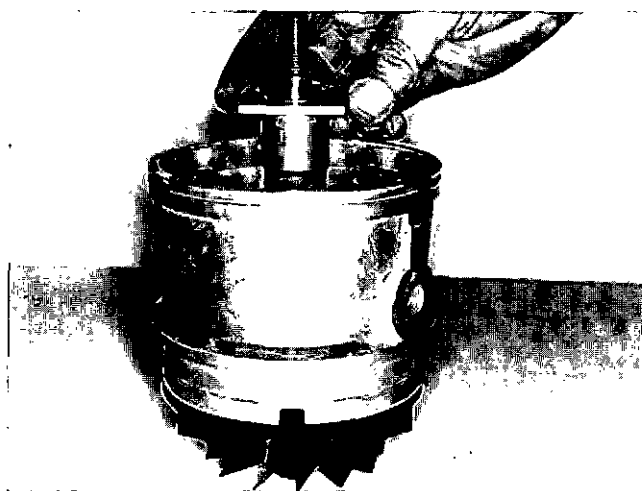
, (VTST38). Installing the turbocharger bearing
